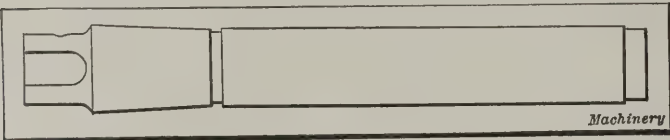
Arbor used when Grinding the Jig Bushings in Fig. 4
